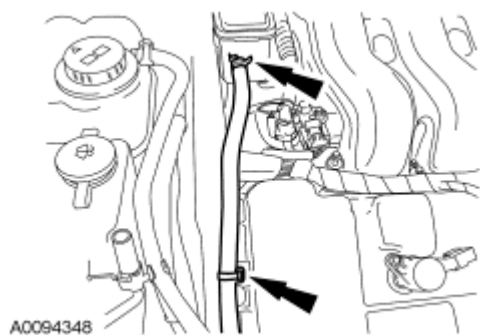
Locating Power Steering Reservoir Hose & Retainer
